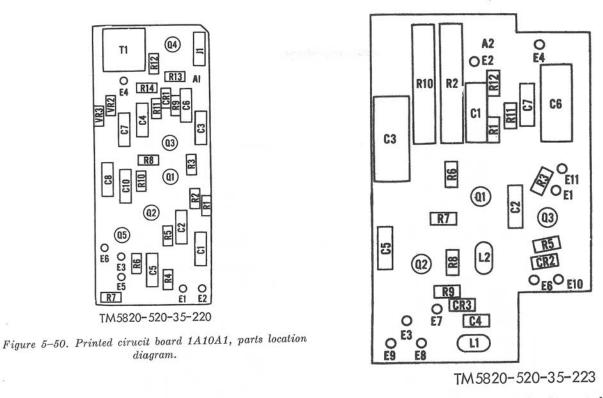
Printed circuit board 1A10A2, parts location diagram.
